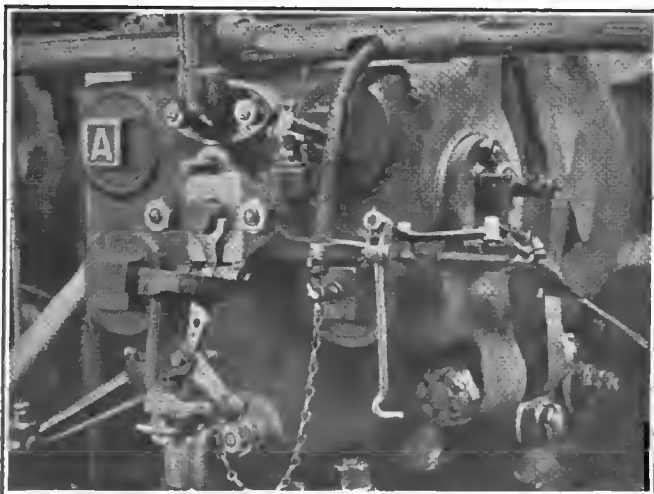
STARTING CARTRIDGE INSERTED IN SPARK PLUG OPENING IN COMBUSTION CHAMBER ON CYLINDER HEAD.
